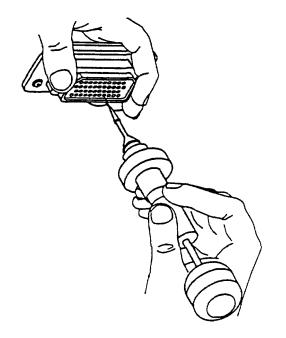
Rear Release Unwired Contact Removal (Sheet 2)
